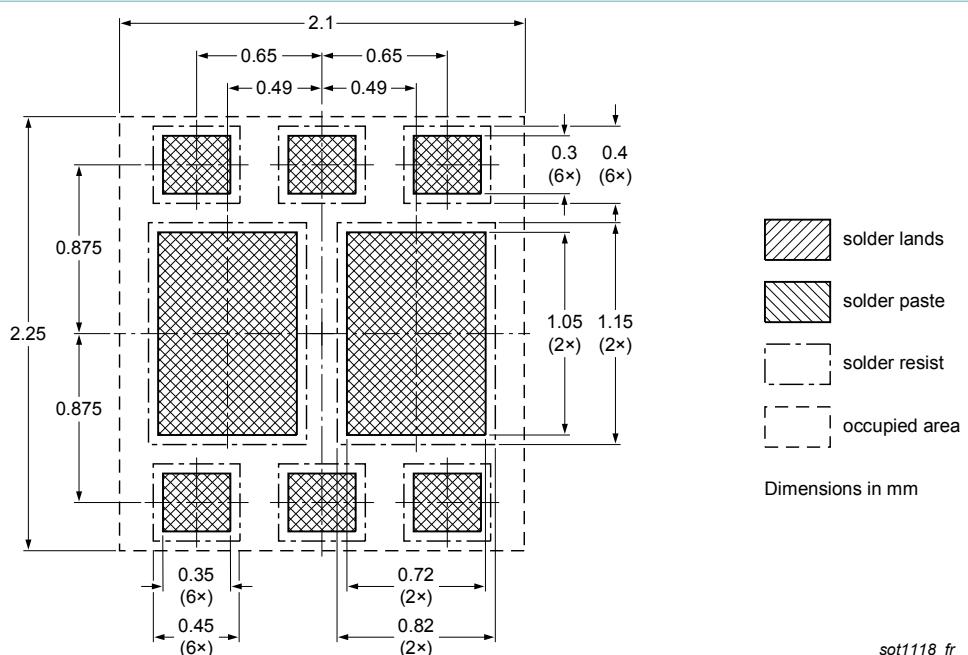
Reflow soldering footprint for DFN2020-6 (SOT1118)
